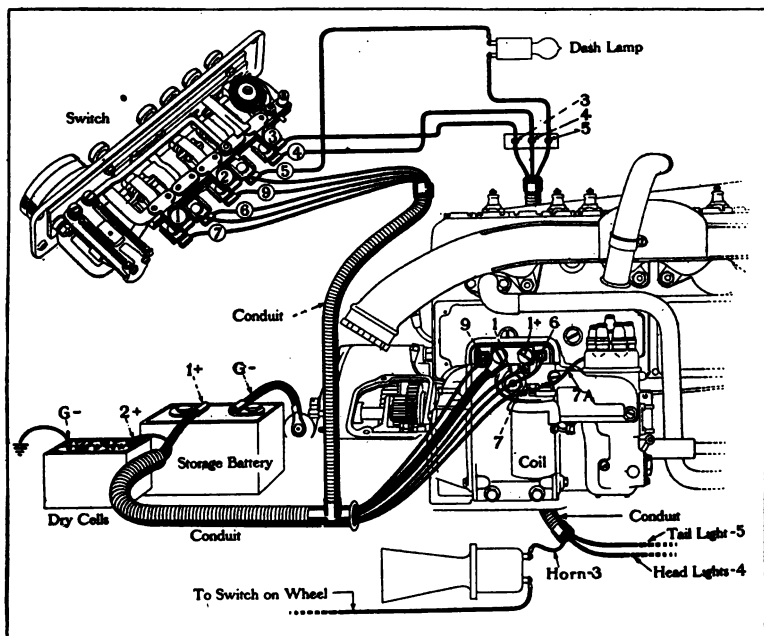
Non-Technical Wiring Diagram Showing Parts of the 1916 Delco-Hudson Ignition Starting and Lighting Systems.
